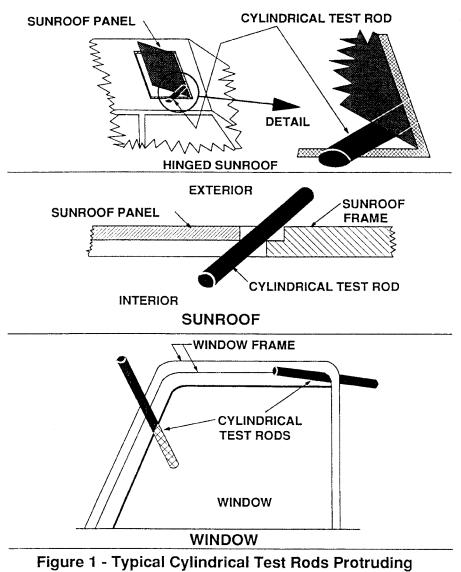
Typical Cylindrical Test Rods Protruding through Sunroof and Window Daylight Openings
